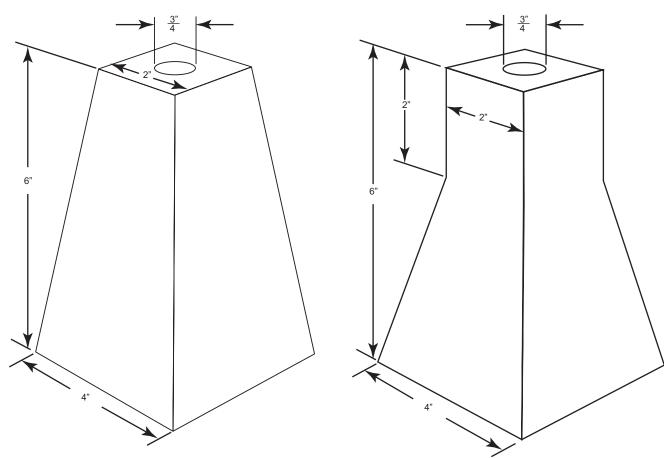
Practice 21-5: Sketch three views of this candlestick holder.
